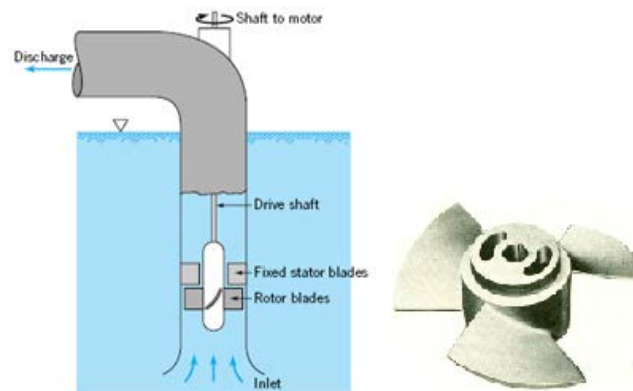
Schematic Diagram of Axial Flow Pump and Impeller
